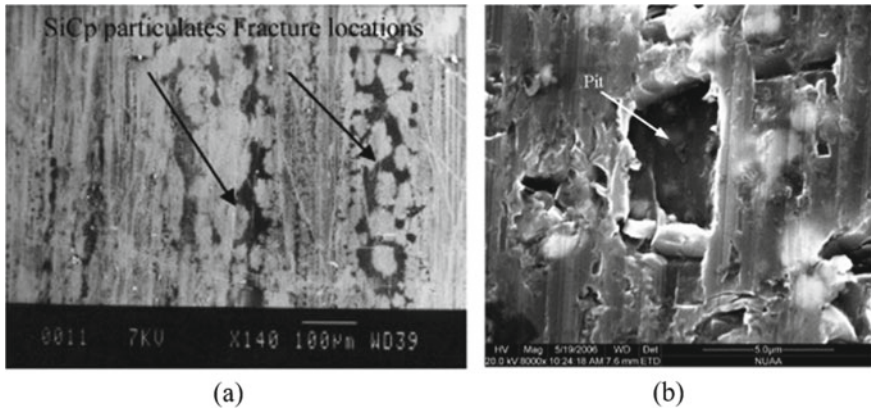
Example of machining induced damage. a Particle fracture [9]. b Particle pull-out [37]
